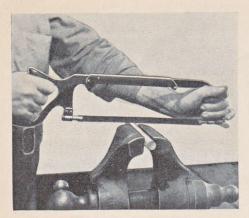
Cold rolled steel shafting 3/4" dia., cut off in 80 seconds with an ATKINS Silver Steel Hack Saw Blade
